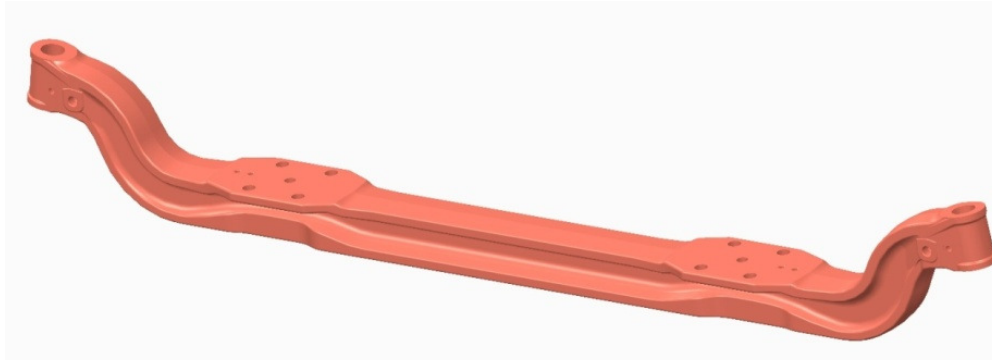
3-D assembly of Front Axle Beam of TATA model truck
